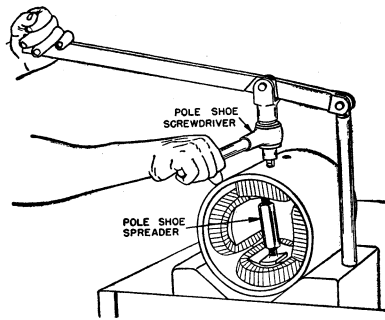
Using pole shoe spreader and pole shoe screwdriver to remove and install pole shoes and field coils
